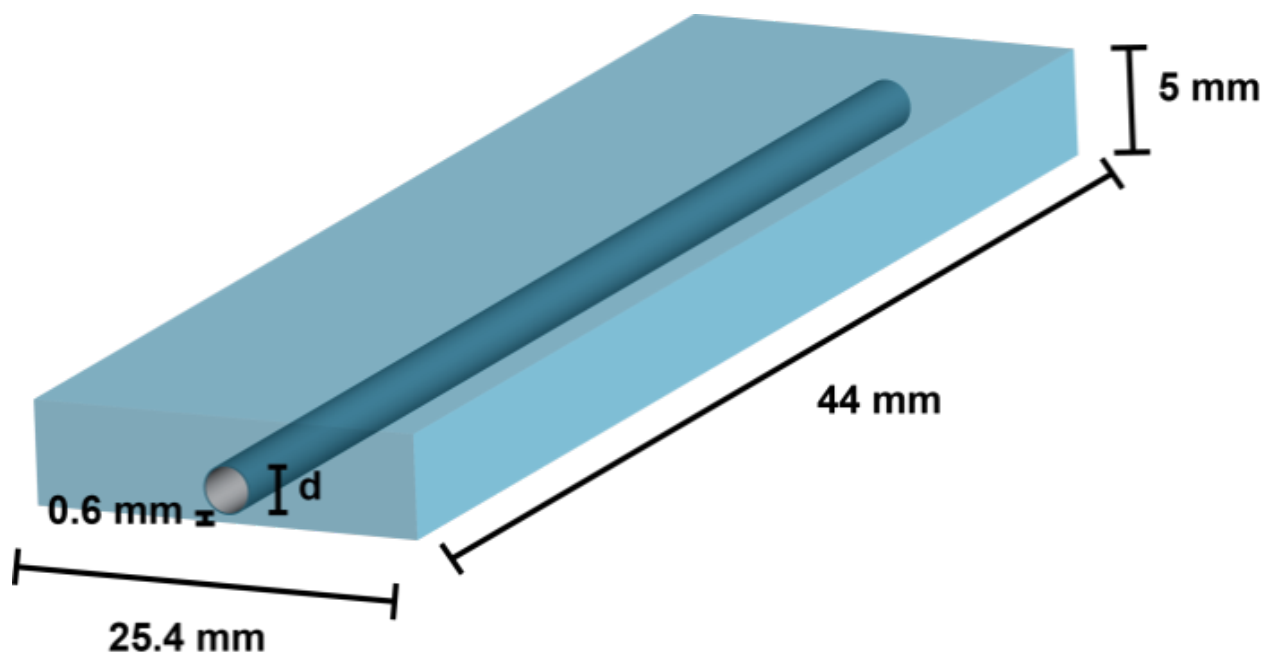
Stripping unit dimensions. The dimensions of the stripping unit were largely controlled by the size of the mold box. The distance between the bottom of the unit to the channel edge was determined by the thickness of a second PDMS coating. The channel diameter  $d$  varied depending on the experiment.
